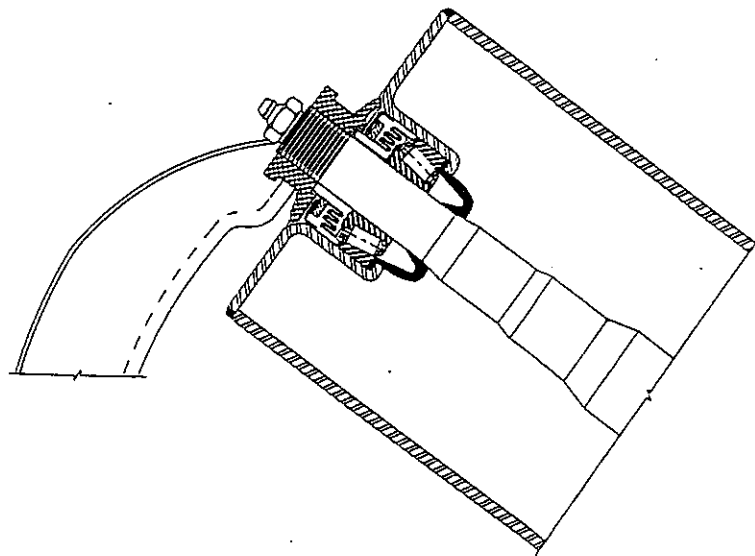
"H-Plus" idler roll featuring triple labyrinth, lip seal, tapered roller bearing, end pointed hollow shaft.
